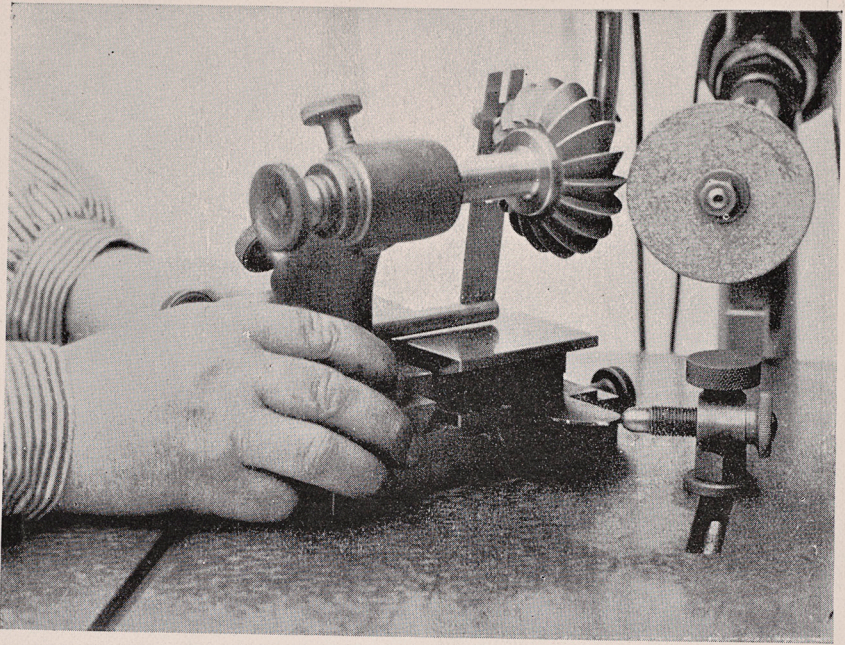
Grinding a Cutter, used for fluting Twist Drills.
